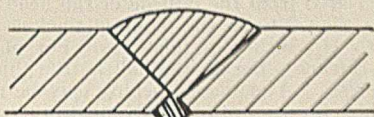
Single-V Weld with Incompletely Fused Filler Material Chipped Out and Filled In from Opposite Side of Plate
